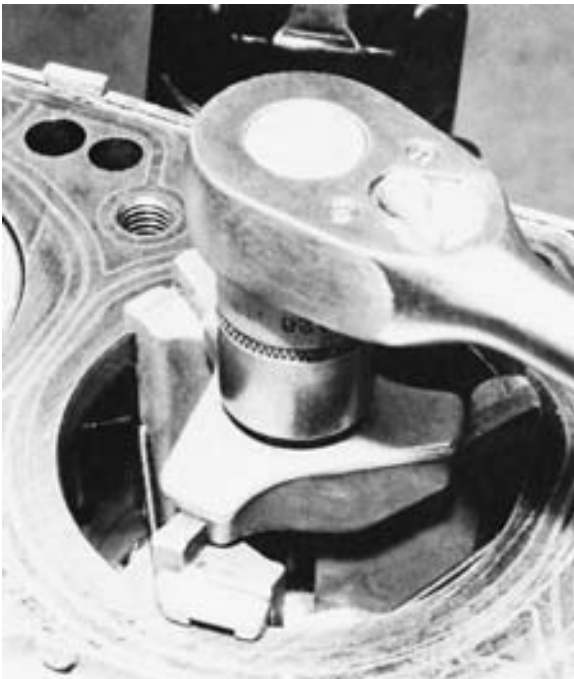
Ridge being removed with one type of ridge reamer before the piston assemblies are removed from the engine.
